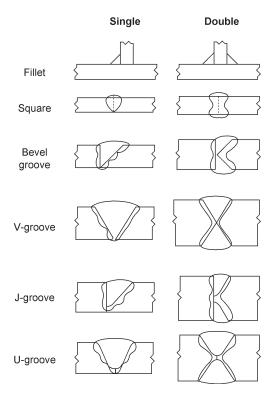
Types of welds. Source: Ref 1.1
